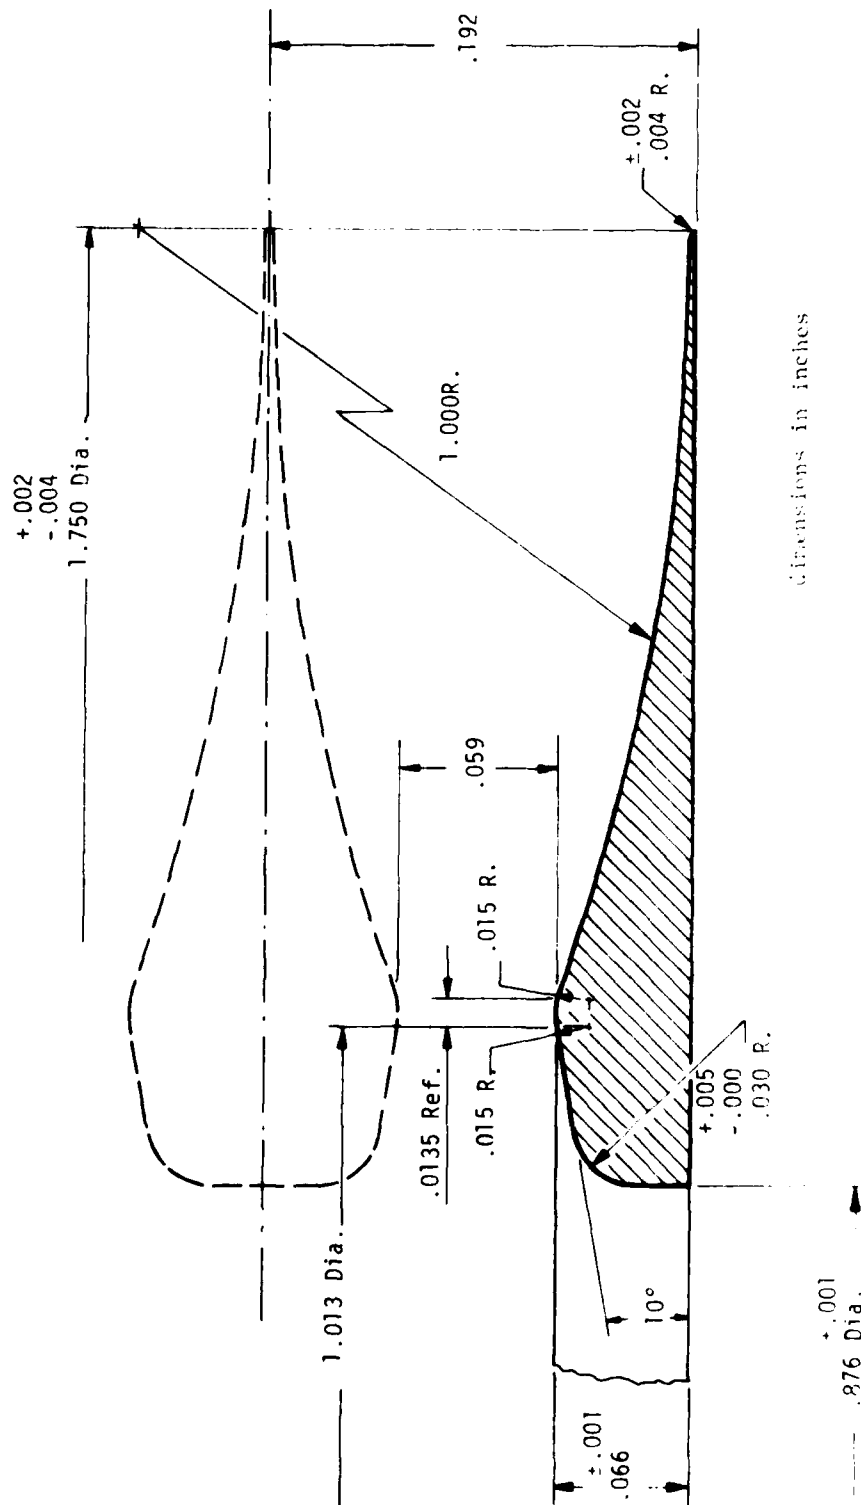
Nozzle Pin Drawing (Full Pin and Half Ring)
